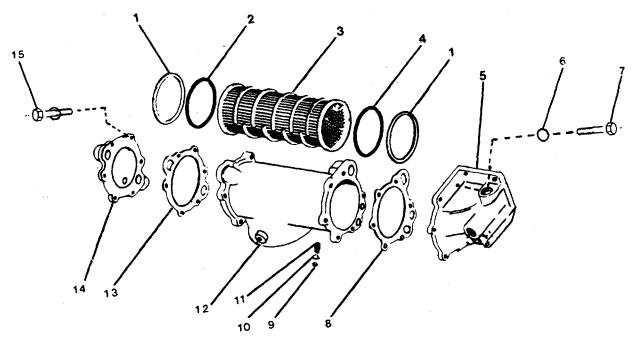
Oil Cooler/Filter - Filter Element Removed.
